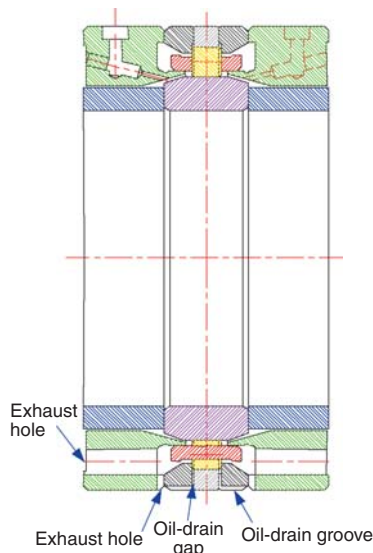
Oil-drain groove structure NU-type cylindrical roller bearing
